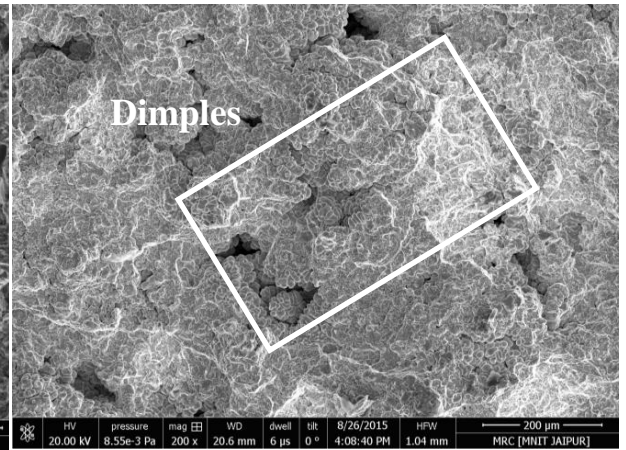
SEM fractographs for 2.5 wt.-% of CaO particulate filled ZA-27 alloy composites after fracture test
